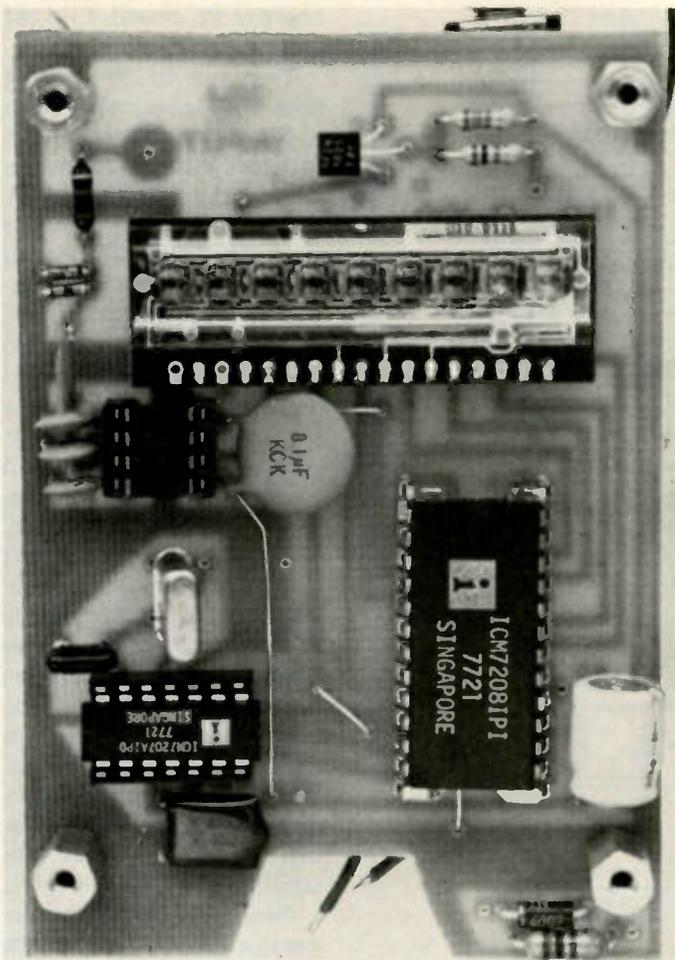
Completed component side of the circuit board. Your finished board will look like this.
